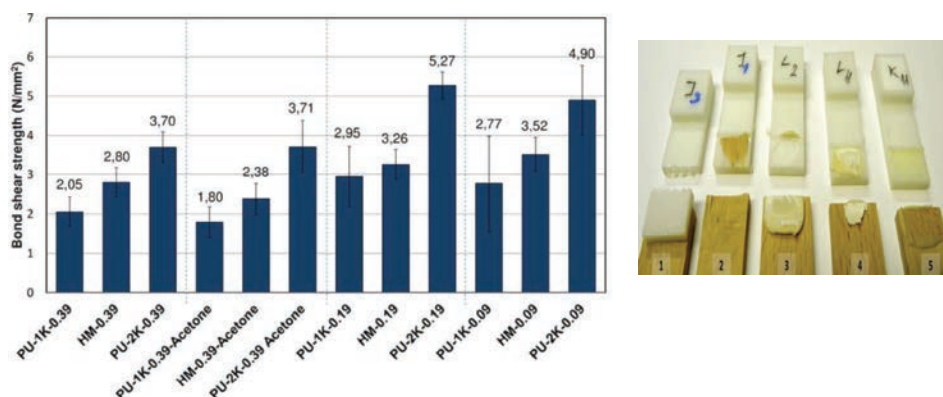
Average tensile bond shear strength for different printing parameters and adhesives (left). Different types of specimen failure. (1) Tensile failure, (2) wood failure, (3) 3D printed part failure, adhesive adhesion failure, and (5) adhesive cohesion failure (right).
